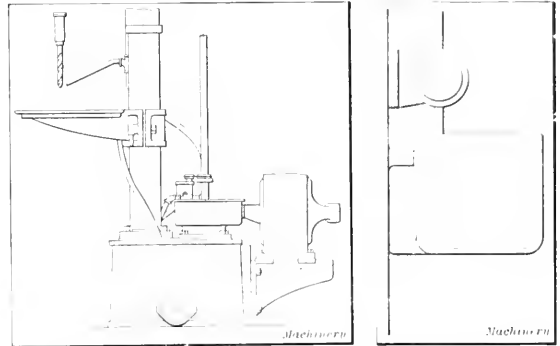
Base of Drilling Machine used for Lubricant Tank
